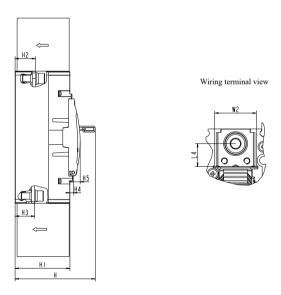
TGM3DC-125~800 outline and installation dimensions
